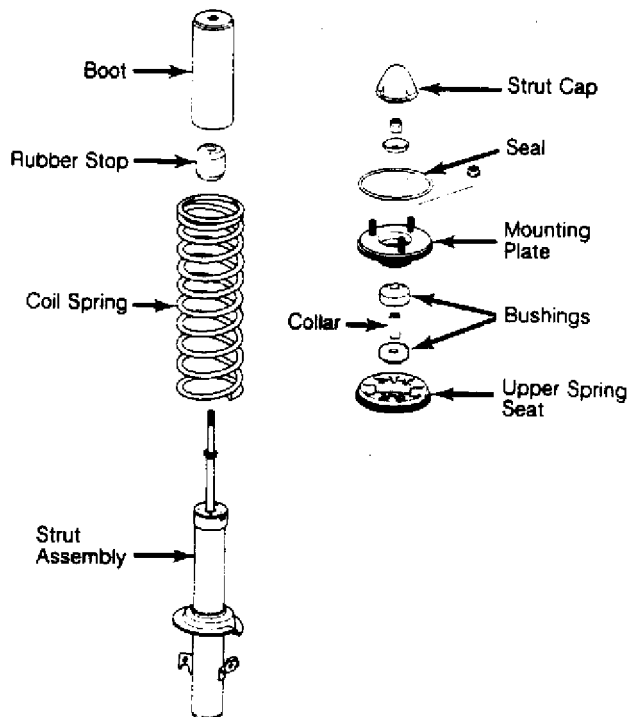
Exploded View Of Strut Assembly (Typical)
